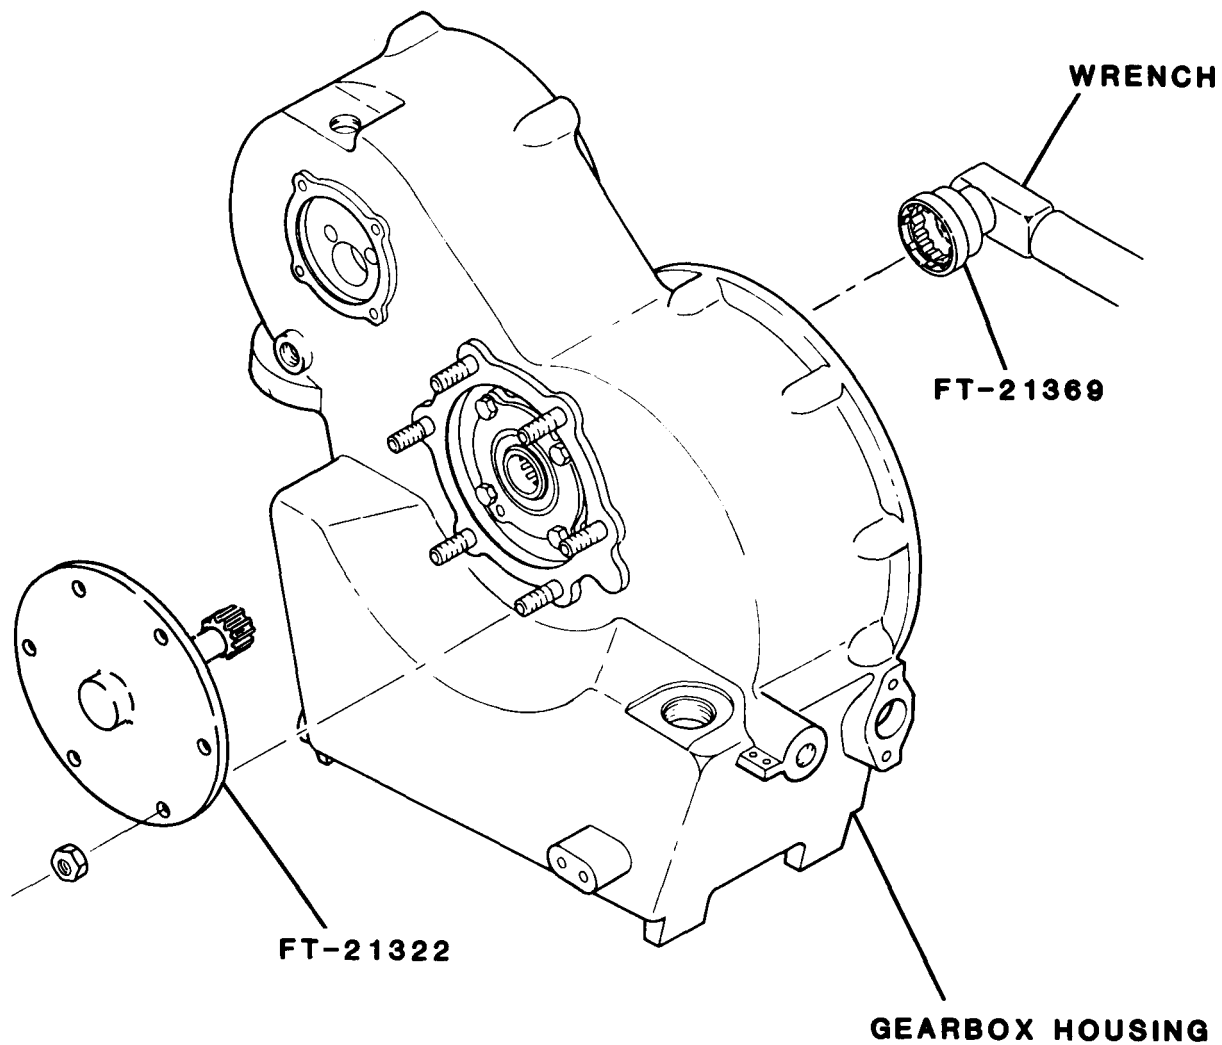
Securing Generator Shouldered Shaft and Removing Nut Using Fabricated Tools FT-21322 and FT-21369
